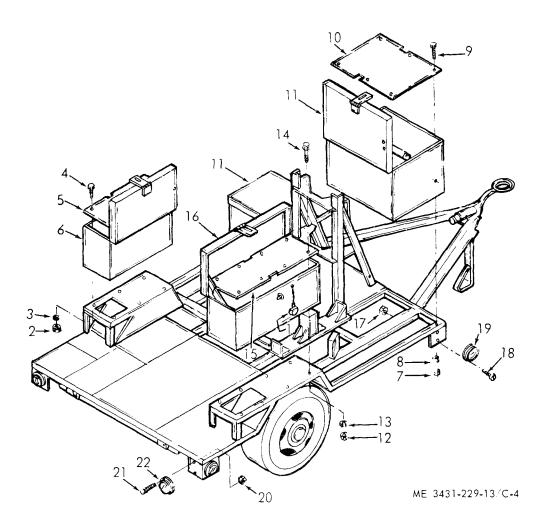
Tool Boxes, reflectors, removal and installation.
